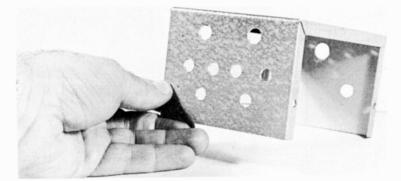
Top of the chassis; four holes are needed for each of the two transistors, Q2a and Q2b. The single hole toward the center is for a solder lug that provides a common connection point for 5 wires.
